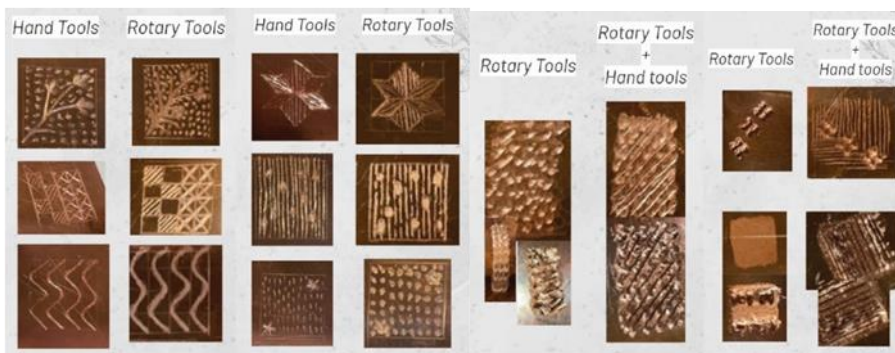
Experiments Comparing Hand Engraving Techniques Using Hand Tools And Rotary Tools On 2mm Thick Copper
